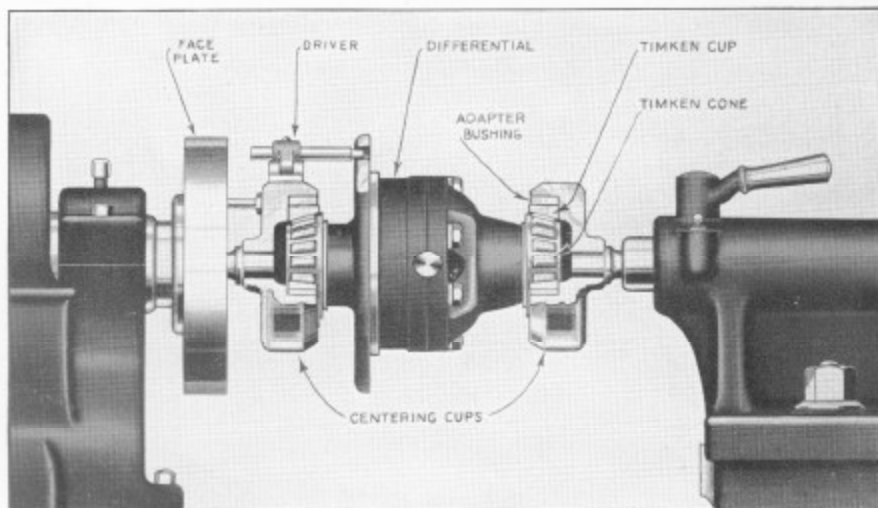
Differential gear case mounted in lathe on its own bearings for testing and truing flange.
